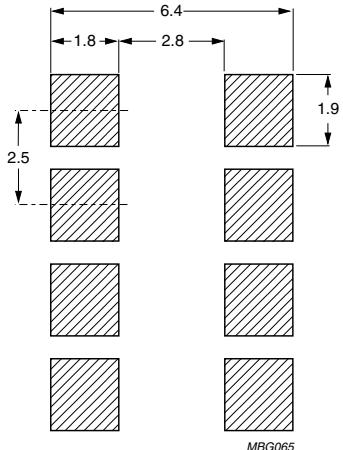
Solder lands for reflow soldering of CMS4-11/3/4.8.
